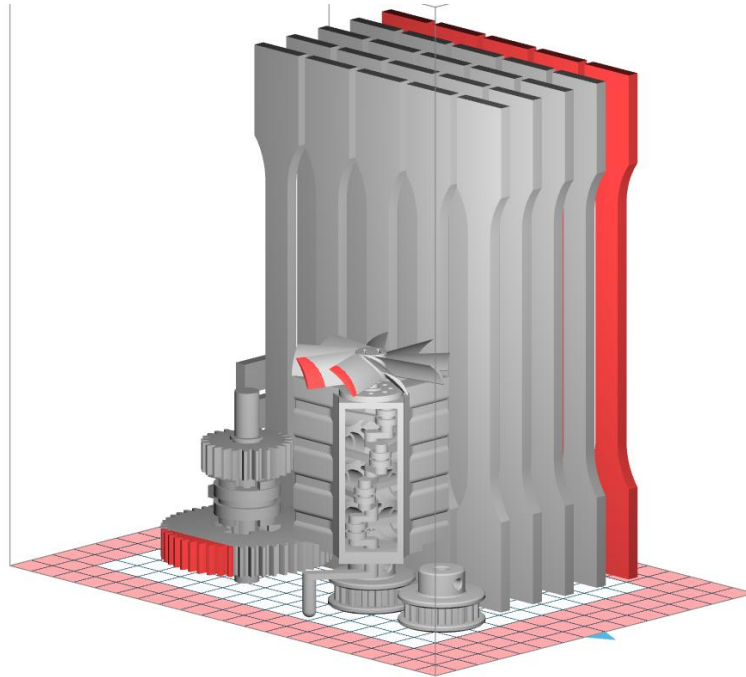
Isometric view of print layout of vertical specimens manufacturing
